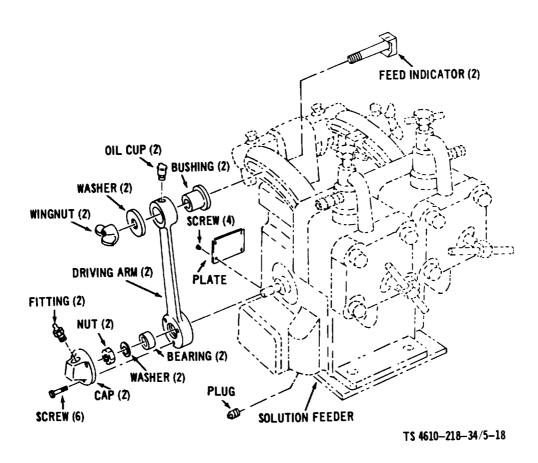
Chemical Solution Feeder Drive Arms, Disassembly and Reassembly
